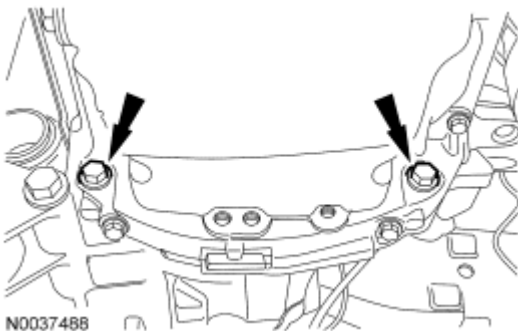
Locating Oil Pan-To-Bellhousing Bolts
